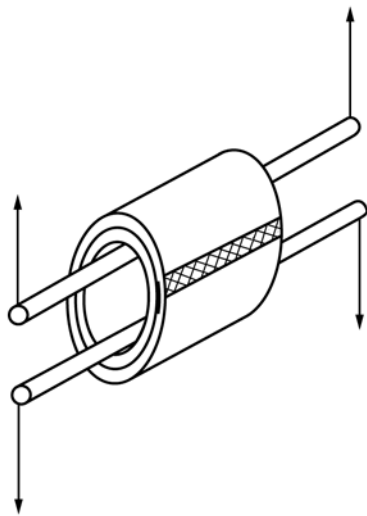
Schematic Presentation of the Pipe Ring Test Showing the Aluminum Weld at 90° to the Tensile Axis
